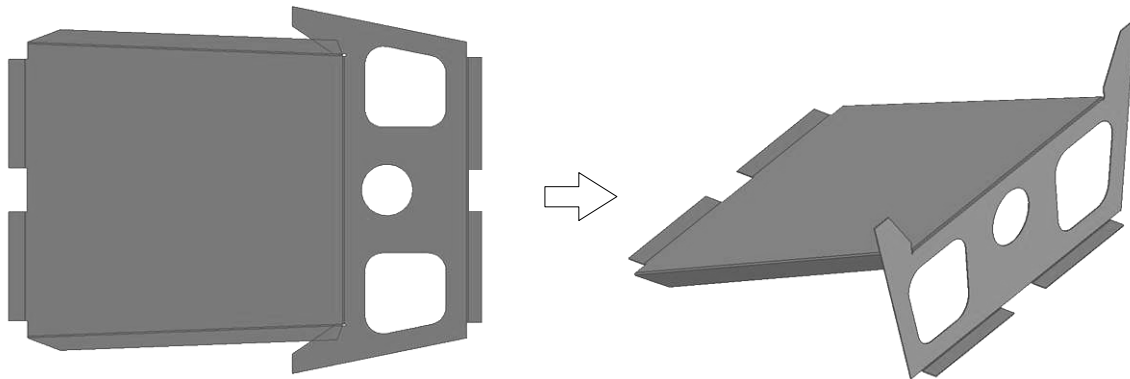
Sloped floorpanel layout and folded sloped floorpanel
